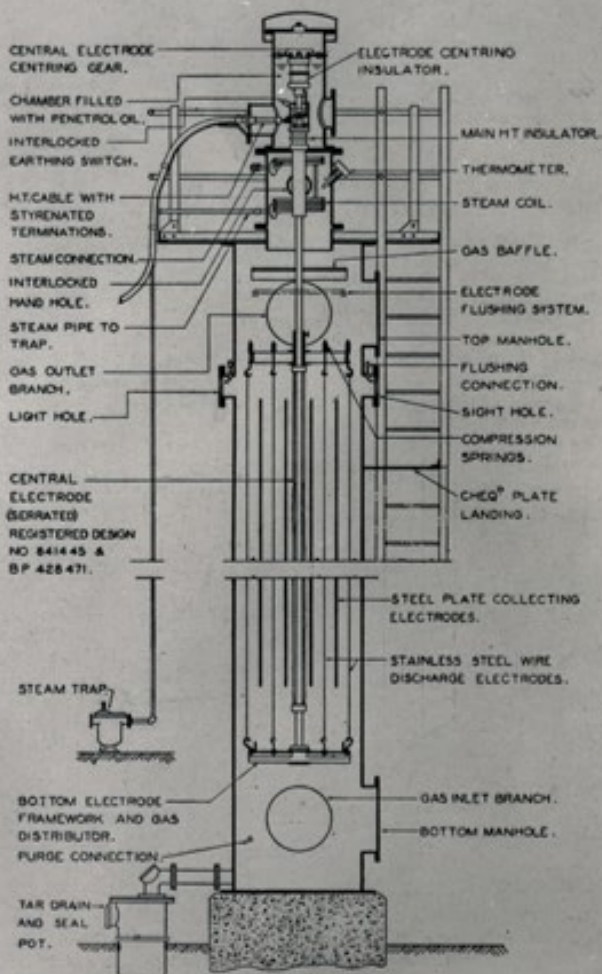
Sectional Elevation Drawing of Whesoc Woodall-Duckham Plate-type Electro-detarrer.
